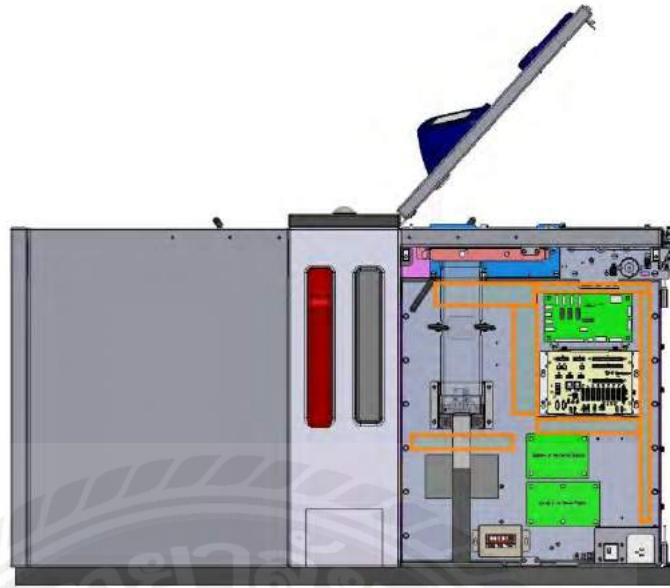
Existing Trunking on Site for S7-S8 AG
